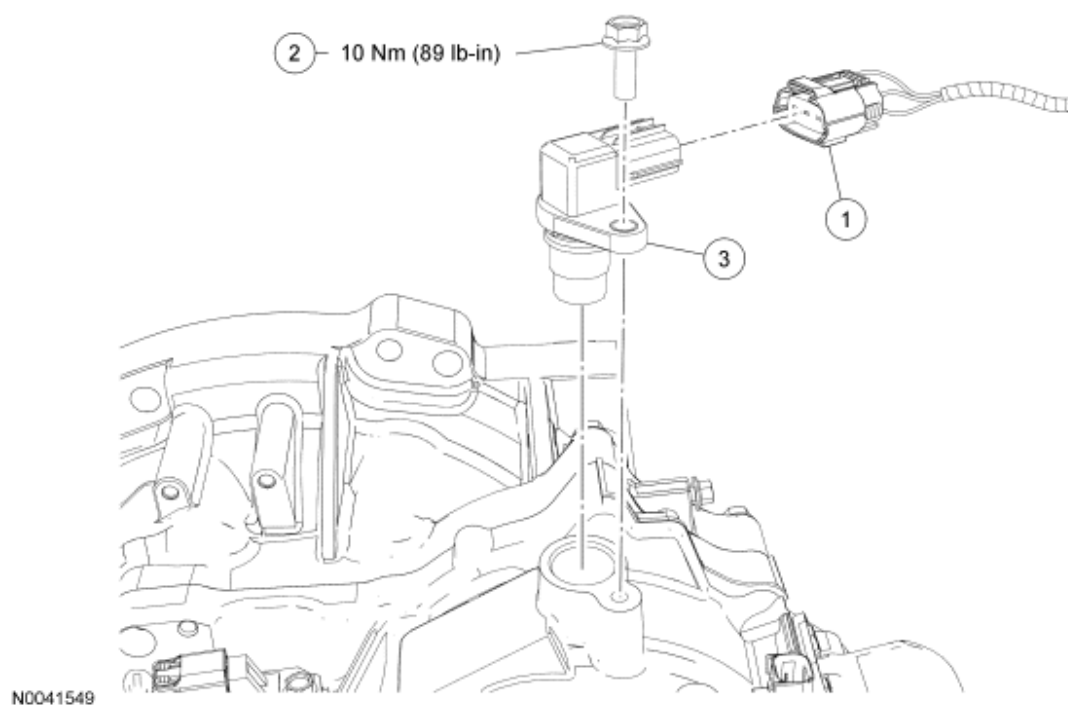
Exploded View Of Intermediate Shaft Speed Sensor With Torque Specification
